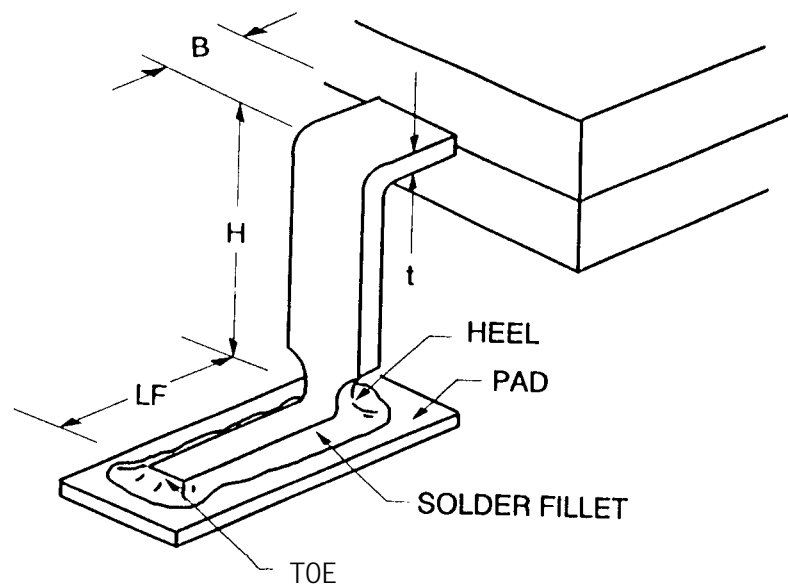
Solder-joint nomenclature and dimensions definitions for flat-pak parts mounted with gull-wing leads.
